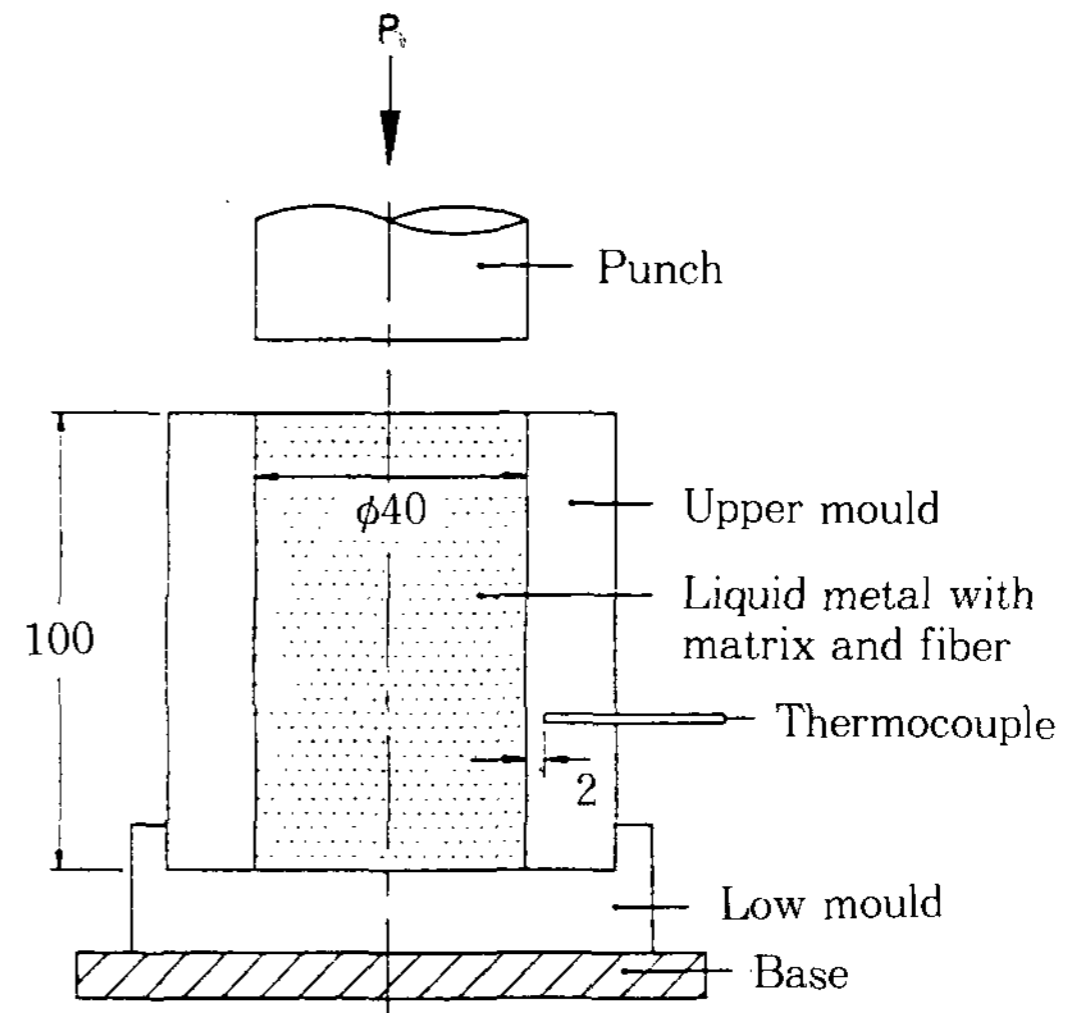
Schematic diagram of Extrusion billet fabrication mold
